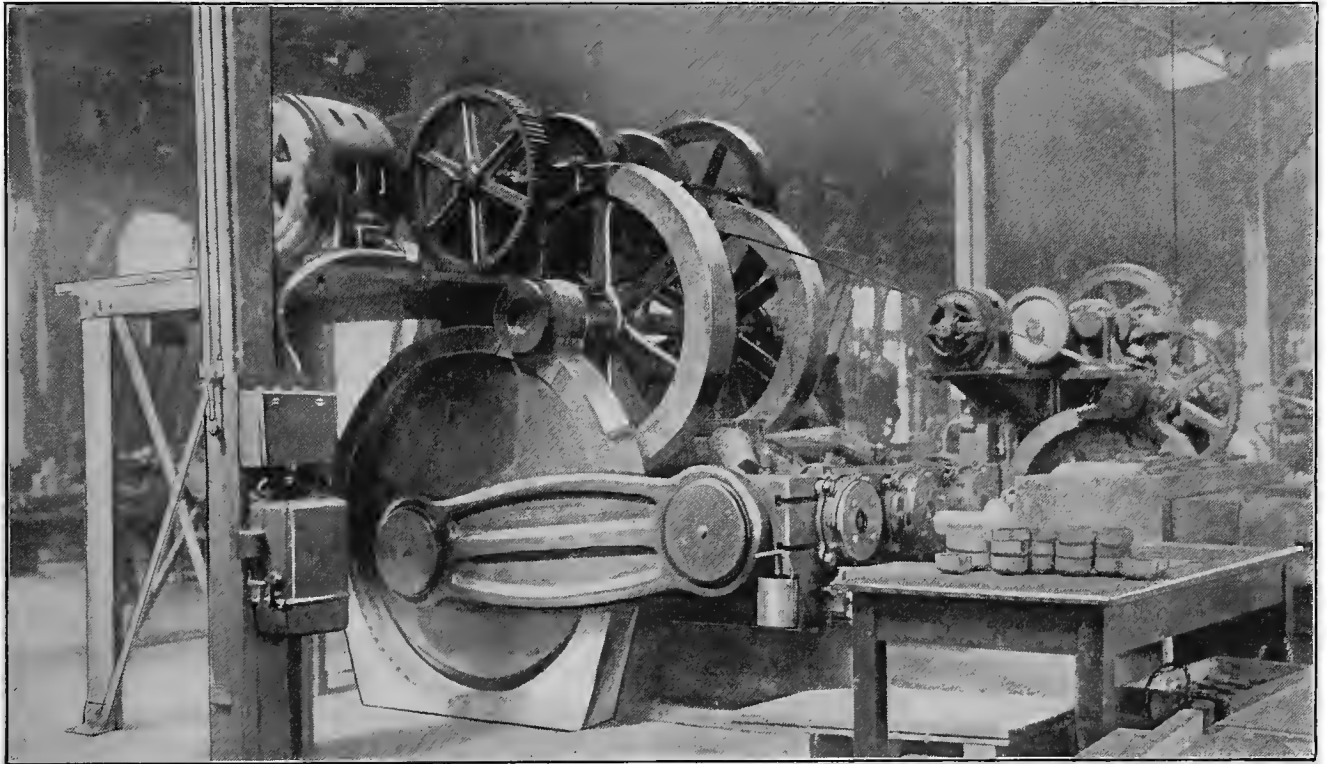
BULLDOZERS HAVE FOUND A NEW FIELD OF APPLICATION
